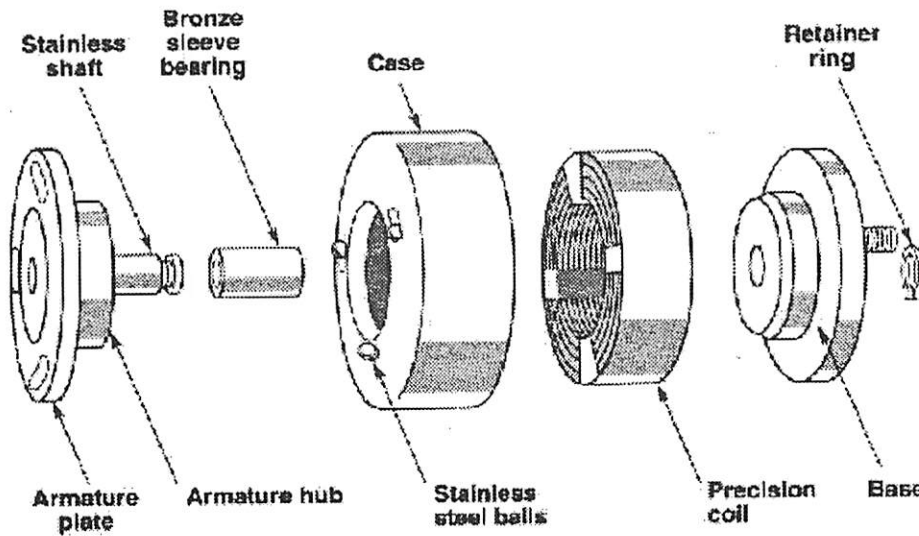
This picture shows an exploded view of the the rotary solenoid.
